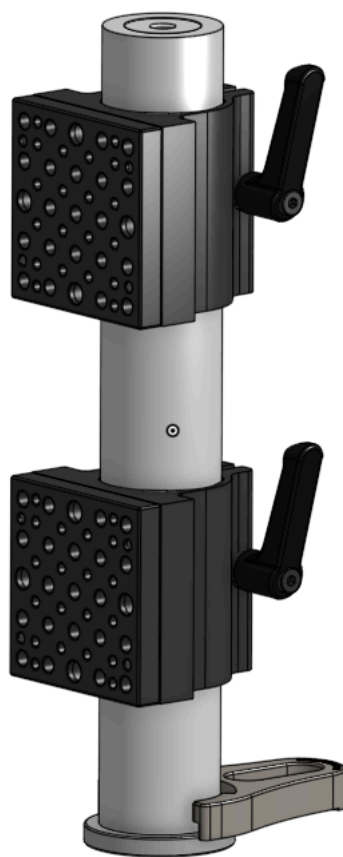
CAD drawing of the Modern translation/rotation holder assembly.
